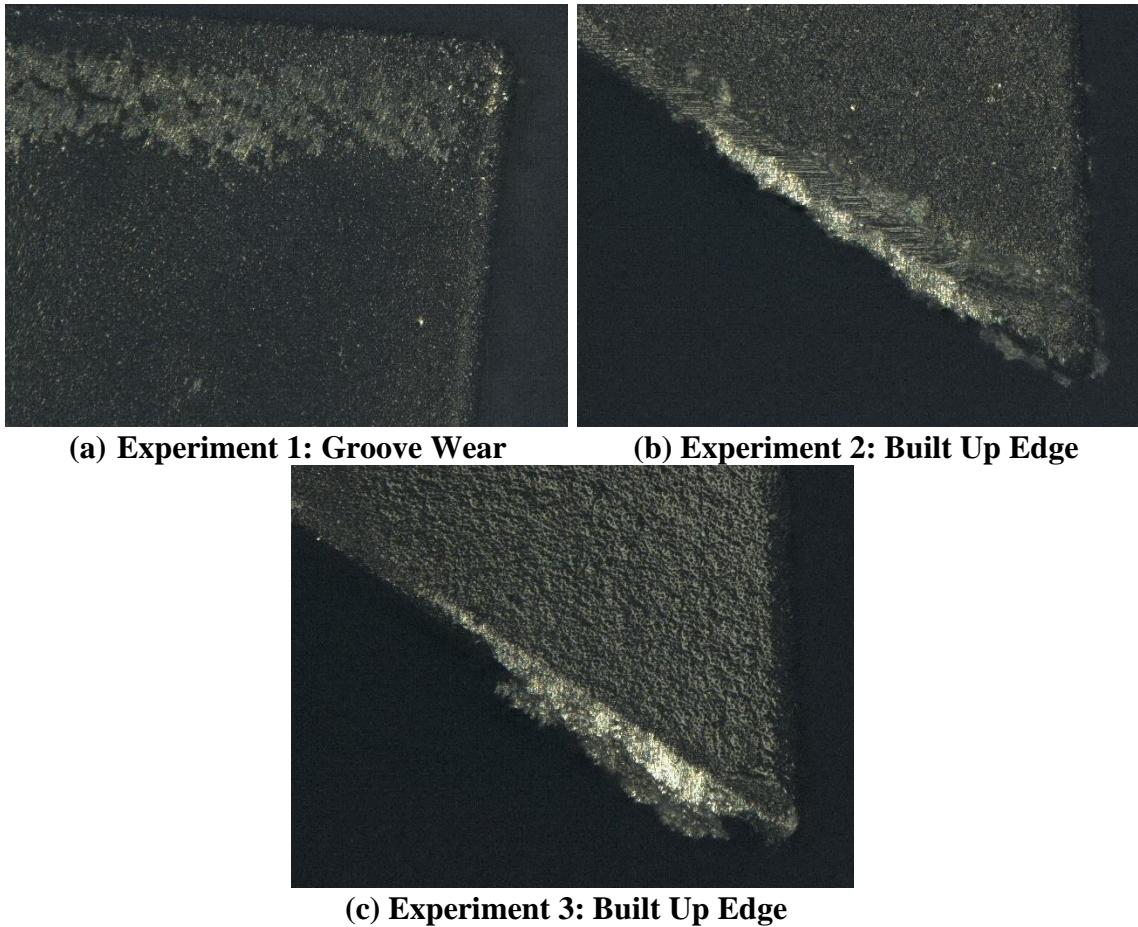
Confirmation tests tool wear mechanisms (a) groove wear (b)(c) built up edge.
